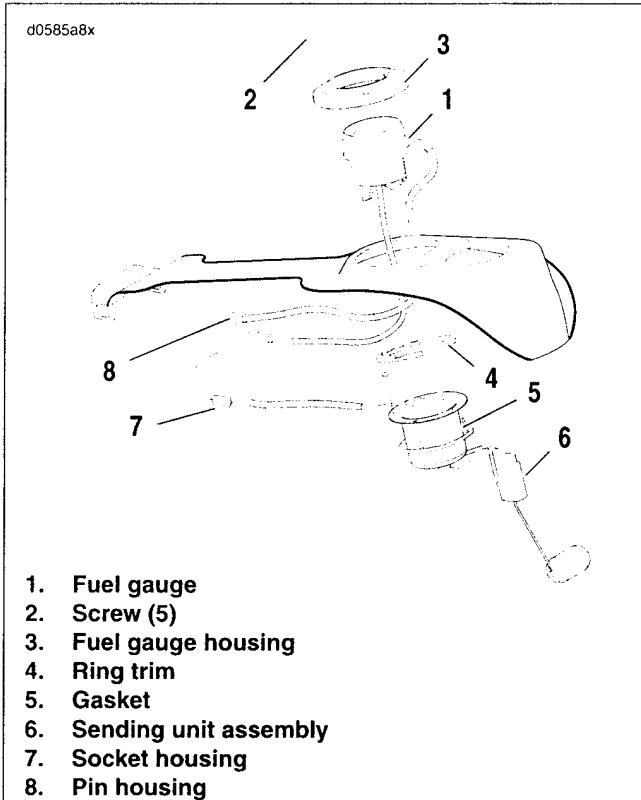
Fuel Gauge: FXD, FXDX, FXDXT
